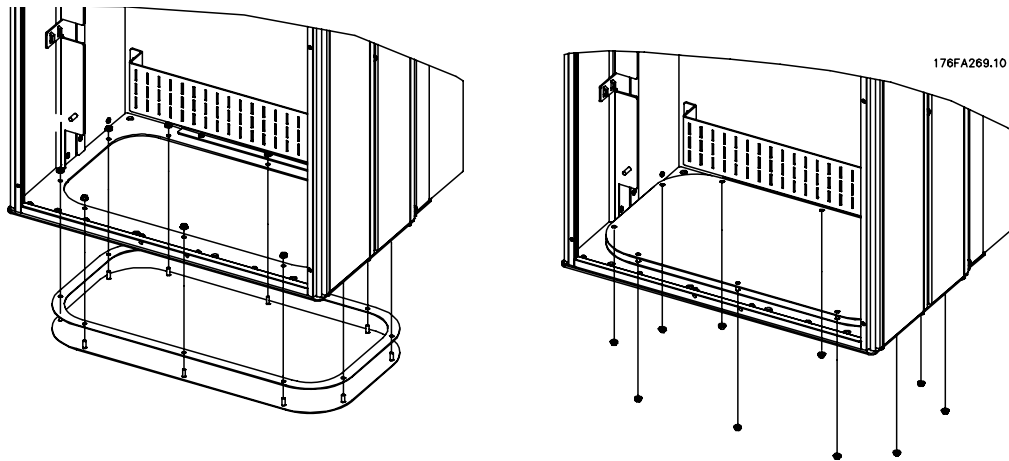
Mounting of bottom plate, Frame size E1.
